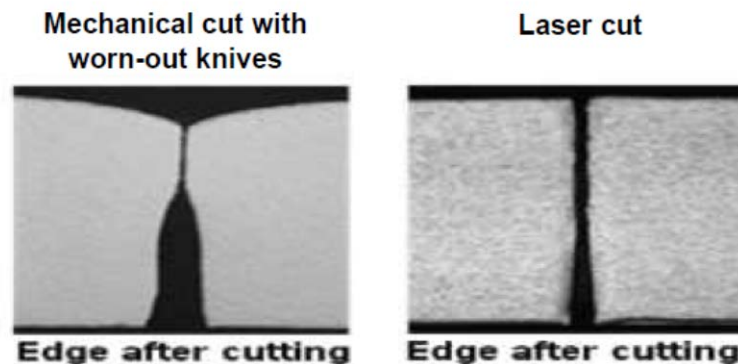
Mechanical cut with worn-out shearing knives (left) vs. laser cut (right).
